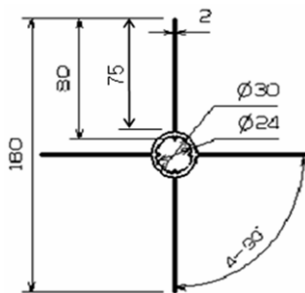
Cross-sectional drawing of the finned vertical pipe.
